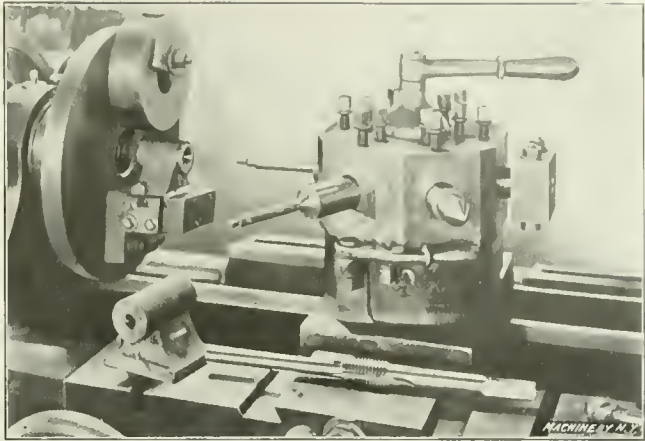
Fixture and Tools used for Drilling, Boring and Tapping Apron Half-nuts
